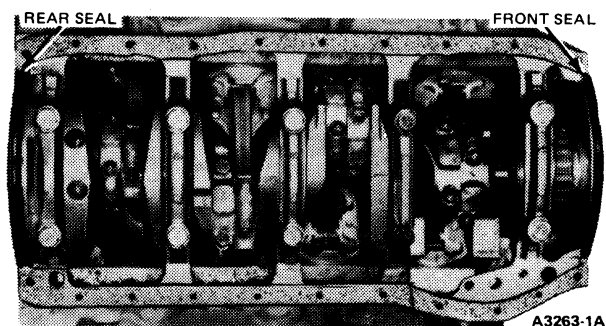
Oil Pan Gasket and Seals Installed—Typical
